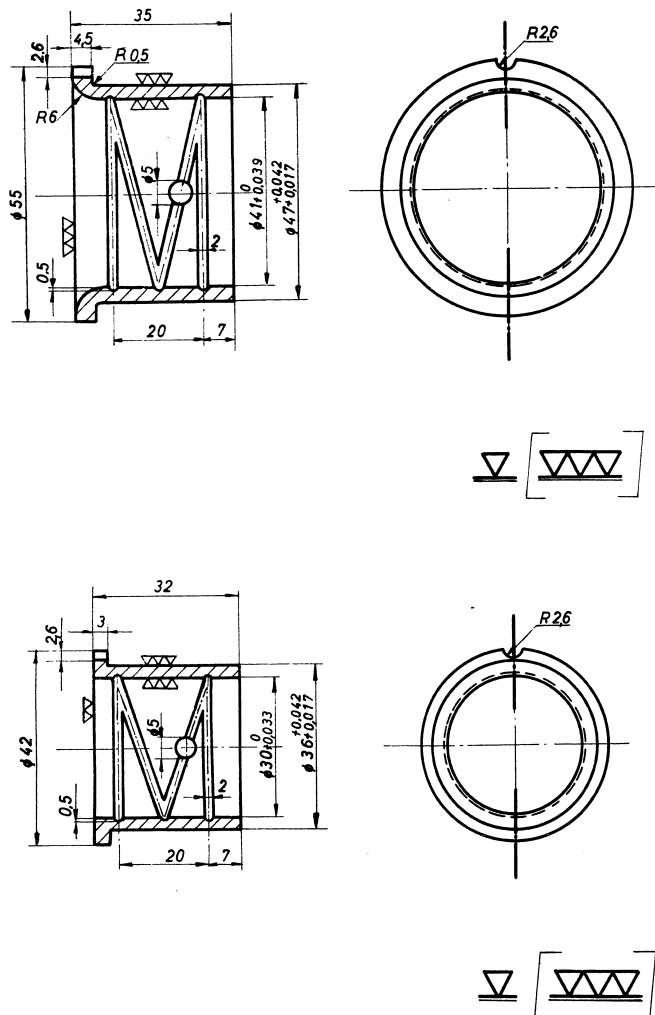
SPRING DEVICE CASING BRONZE BEARINGS
